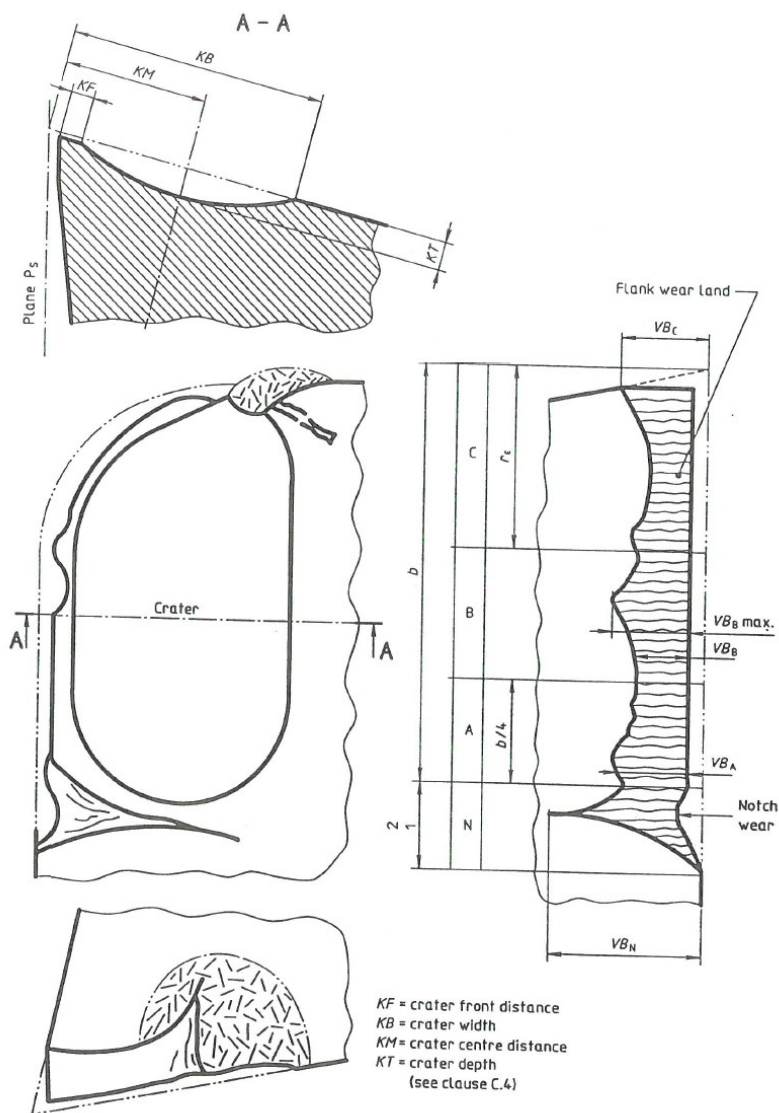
Wear types on a cutting tool in a turning application. [3]
